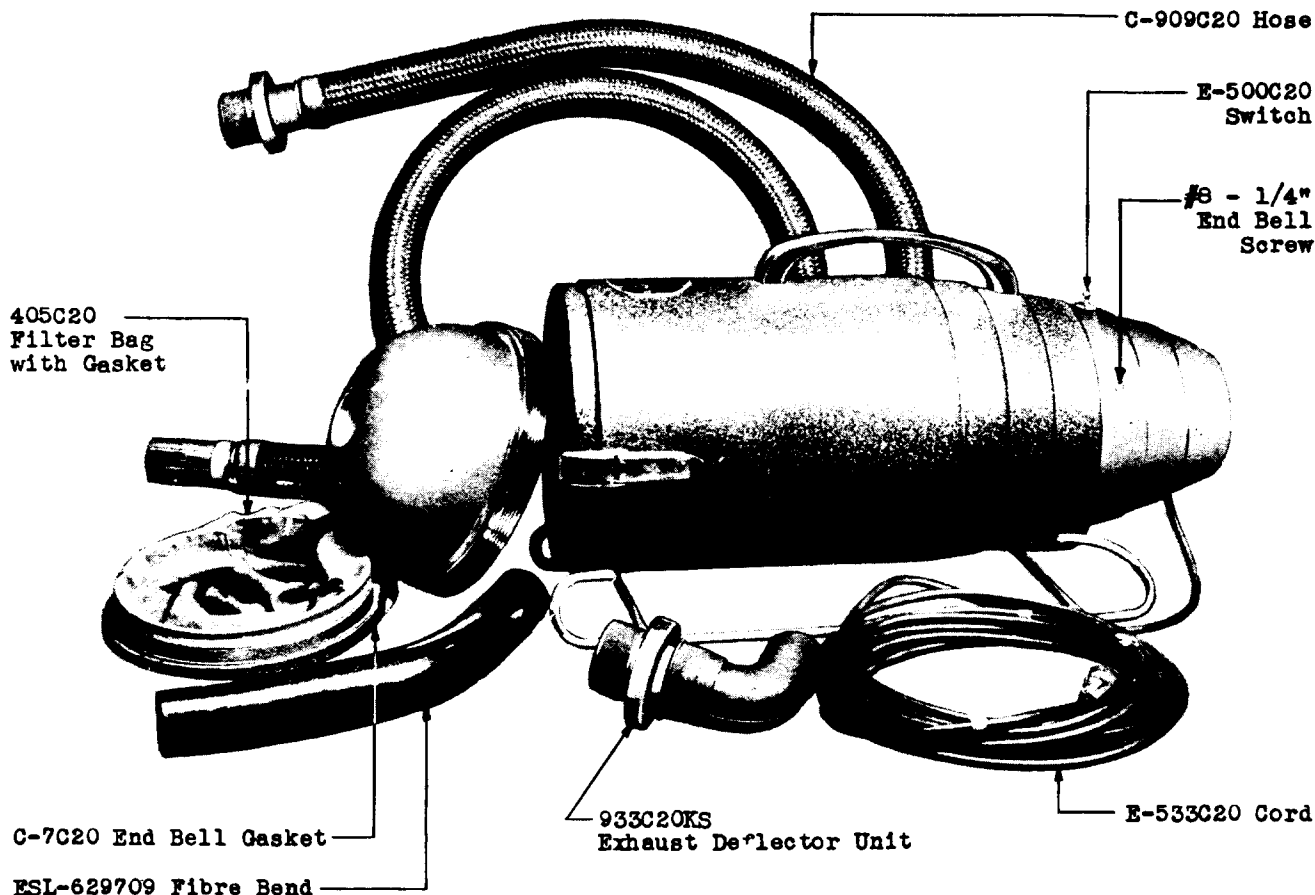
Parts of KS-8389 Vacuum Cleaner
